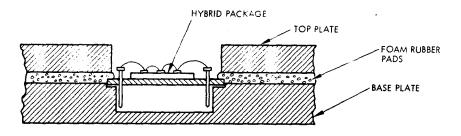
Cross sectional view of hybrid masking tooling for vertical lead hybrid package.
